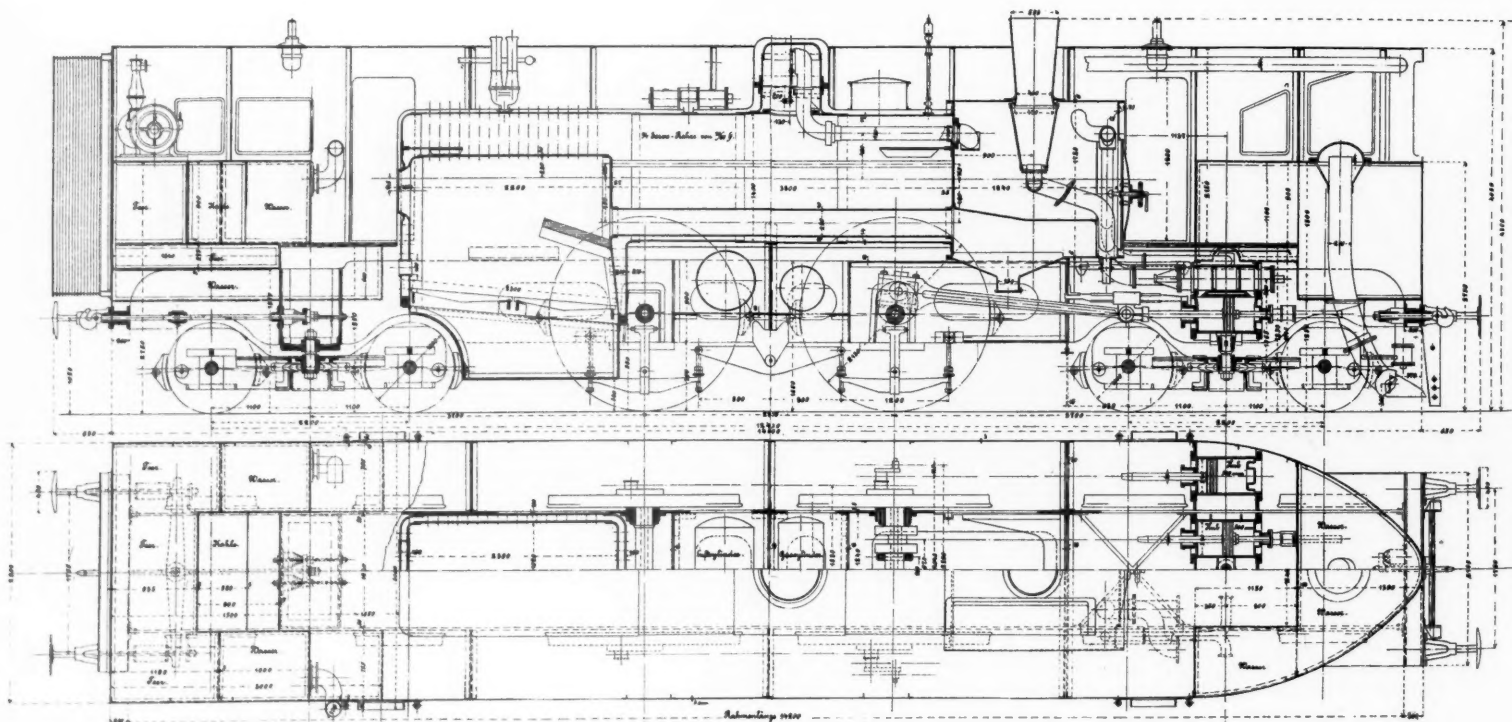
Four-Cylinder Simple Tank Engine—Designed by Government Engineer Mehliis.
